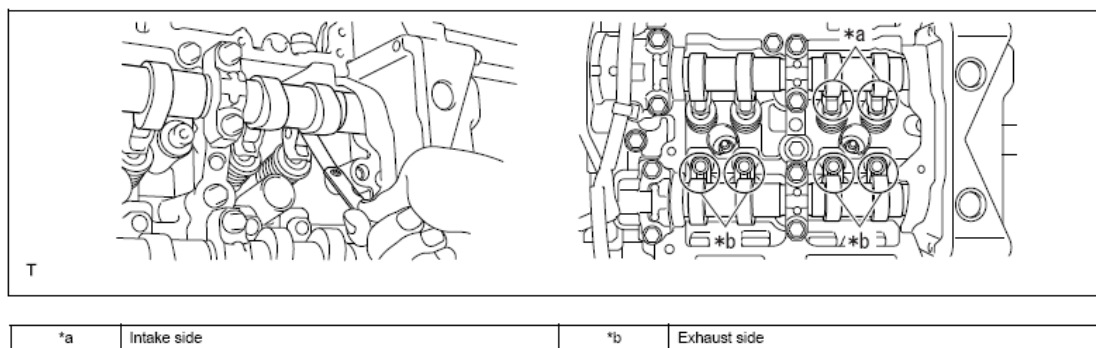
Measuring Intake And Exhaust Side Cam Clearance Using Gauge
